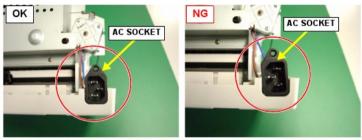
AC SOCKET Installation Direction <LQ-630>
